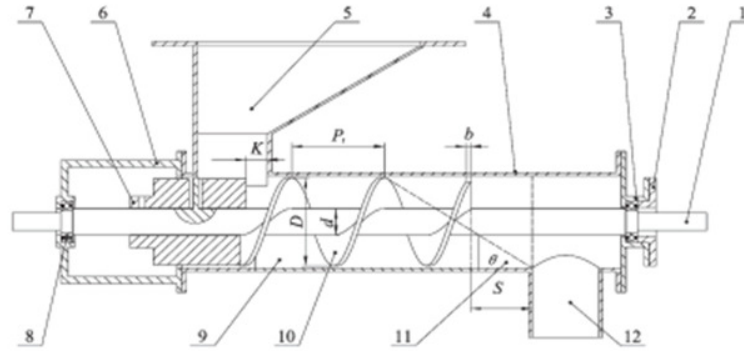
The blocking wheel-type screw fertilizer distributor's structure. Screw shaft 1 Bearing cover 2. 3. The sleeve's end cover, 4. A screw sleeve 5. Pyramidal inlet feeding 6. The nut seat Spiral blocking wheel, number 7.8. Holding 9. A cleaning outlet for fertilizer and its cover 10. Screwdriver 11. The buffer zone for fertilizers Fertilizer outlet 12. Note: D stands for the screw blade's outer and inner diameters in millimeters; P_t for the pitch; b for the screw blade's average thickness; K for the spiral blocking wheel opening width; and S for the outlet distance [7].
